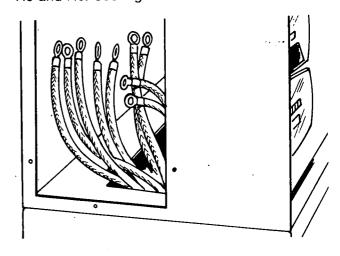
CONTROL BOX (SIDE PANEL REMOVED)
